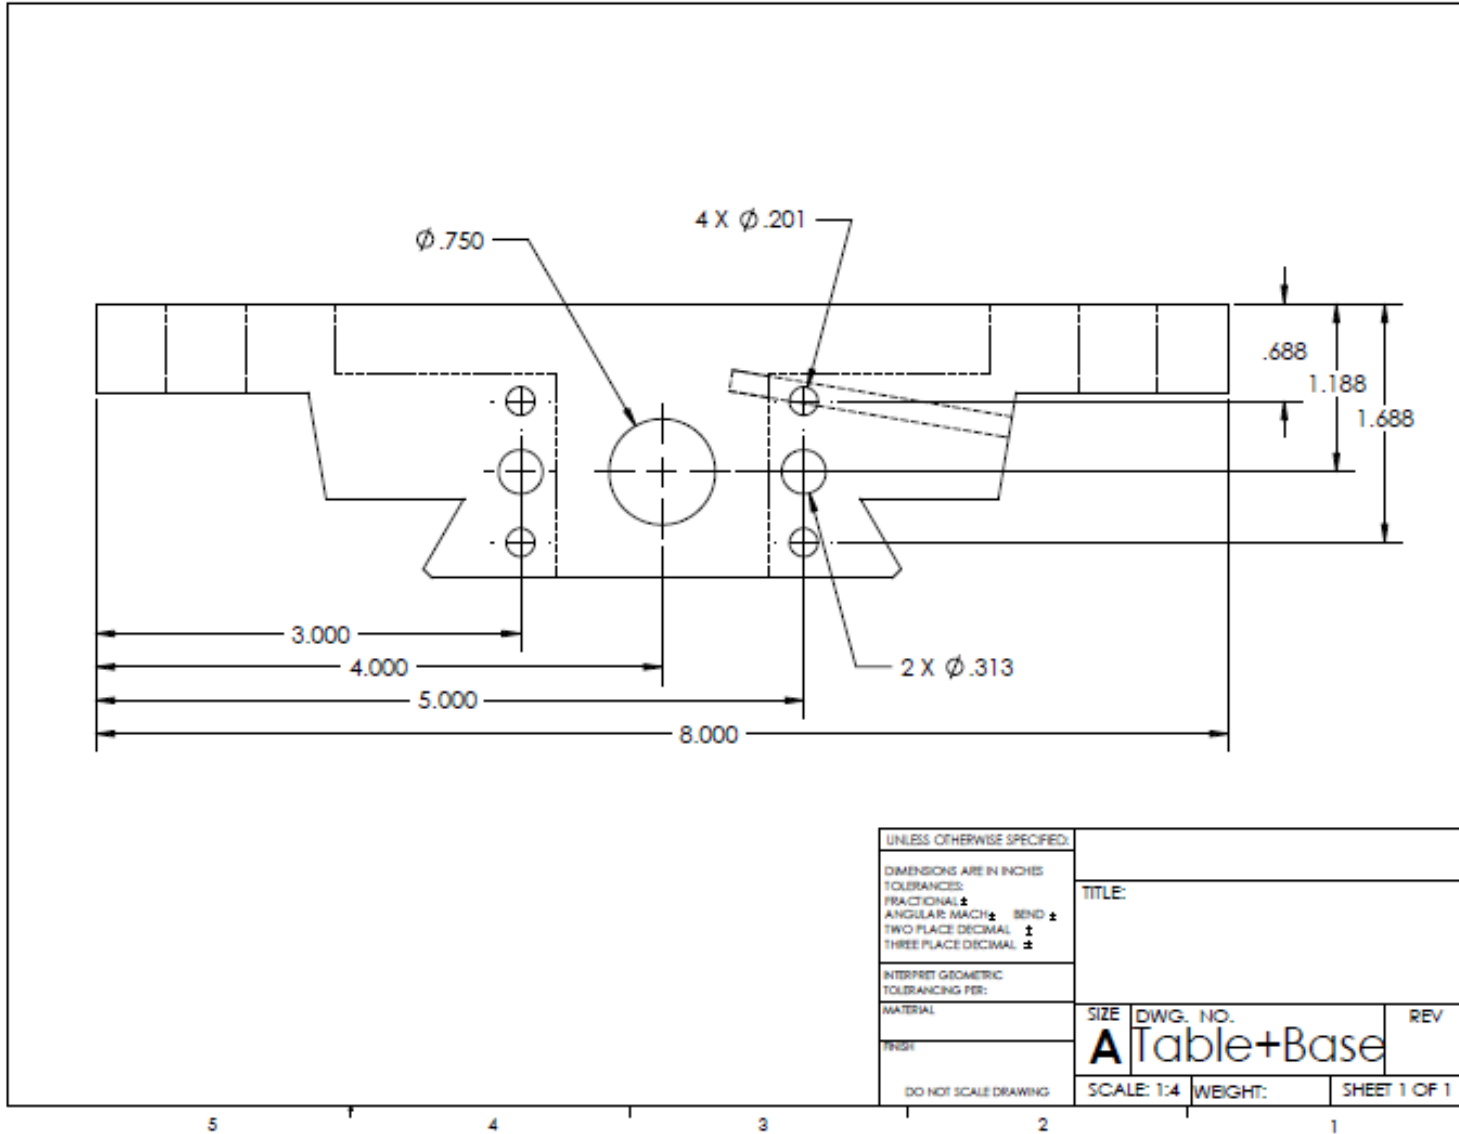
Engineering drawing of the table base revisions needed for the motor mount
